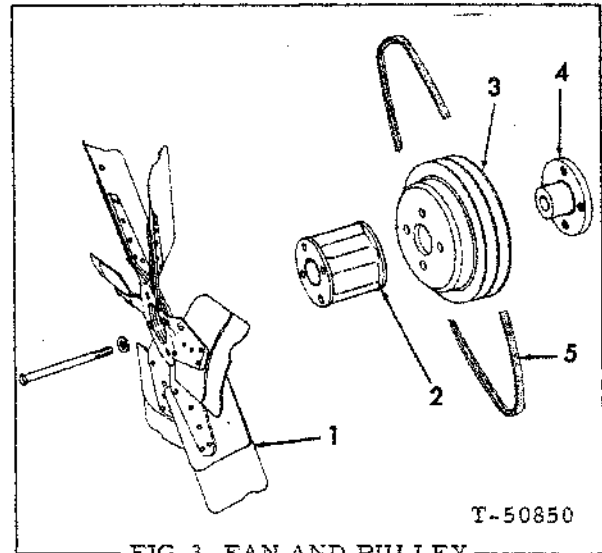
FAN AND PULLEY (WHEEL LOADERS)
